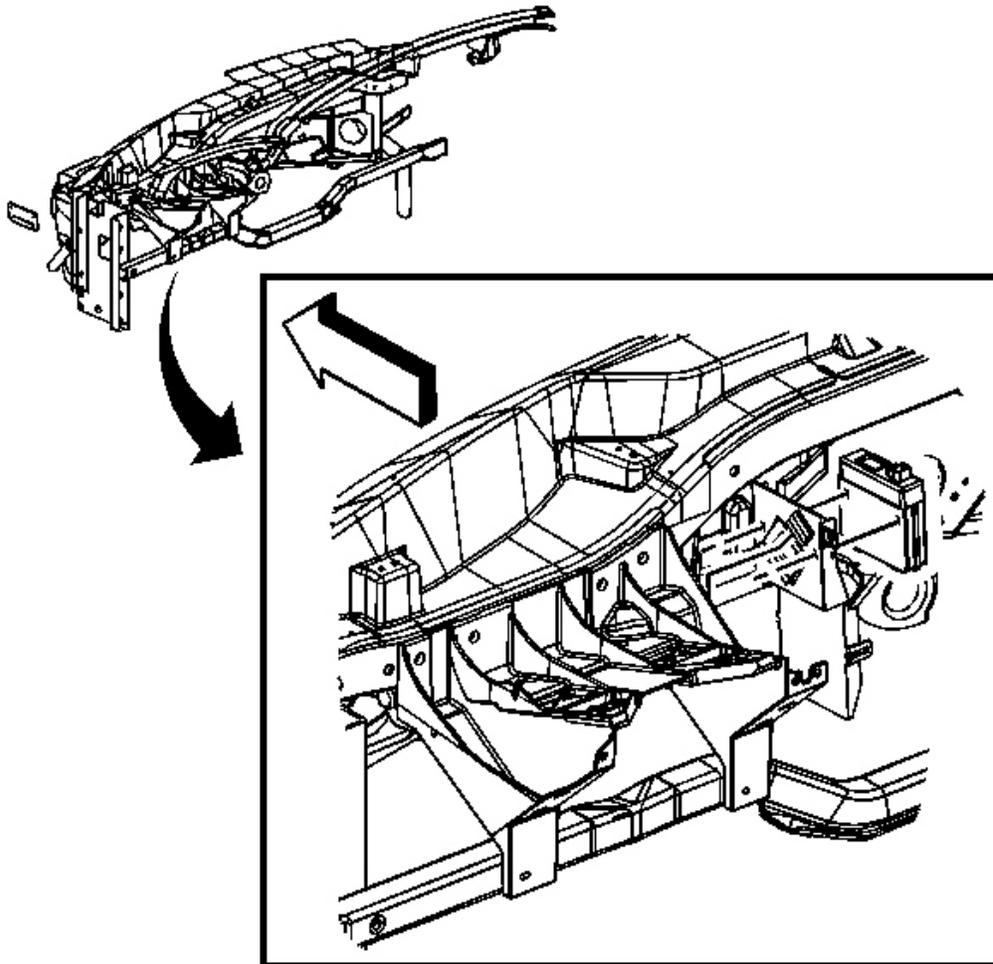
Identifying The Lock Module In The I/P Carrier
